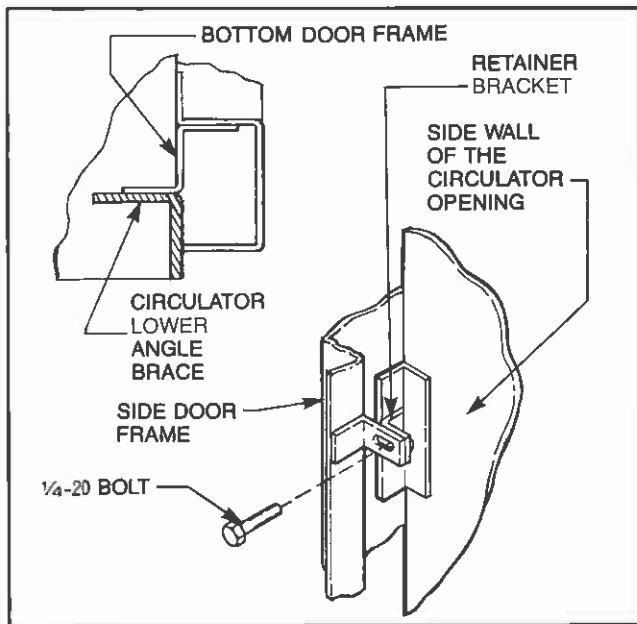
Use four (4) retainer brackets to secure door assembly to Circulator.
